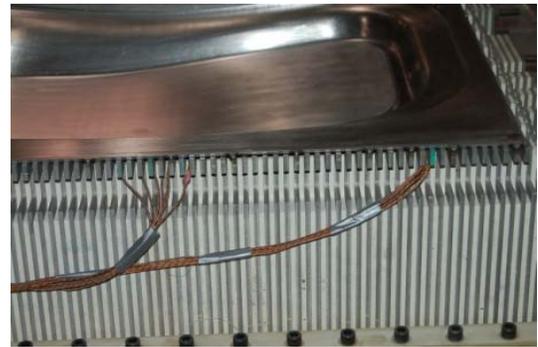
Side view of the stainless steel tool body laminations assembled with the smart susceptor shells tack welded on and subsequently finished machined
